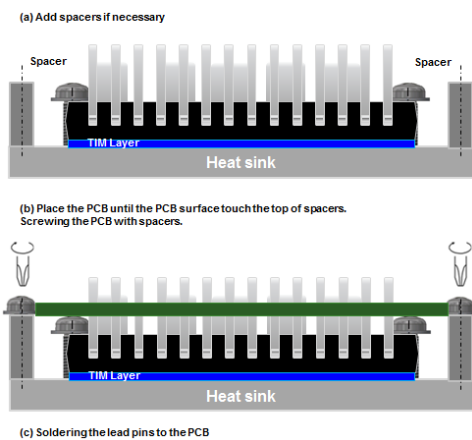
Robust Assembly Method of APM Package to Reduce Stresses from PCB Bending
